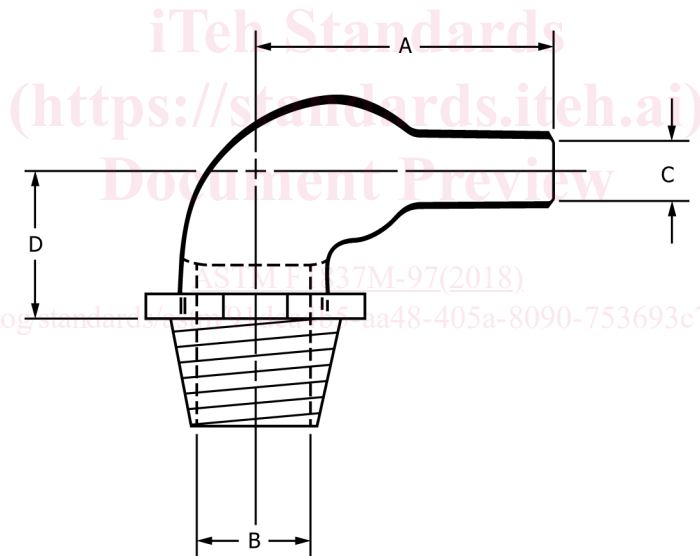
Type IV-Right-Angle Cable Entry Seals
